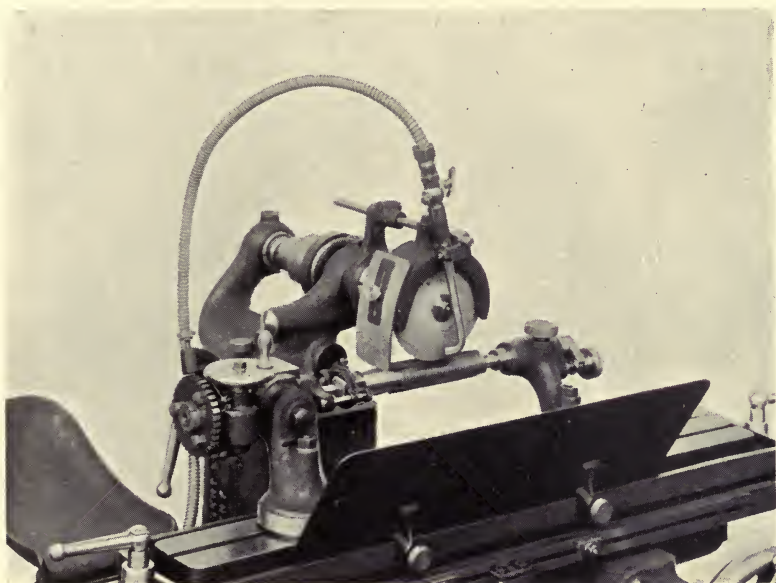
SHARPENING A TAP—HERBERT CUTTER GRINDER
